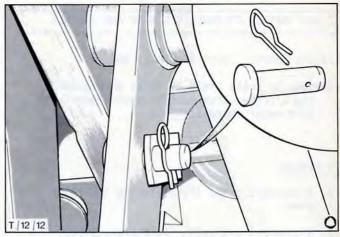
Disconnect brake pedal to servo operating rod. Clevis and spring clip.
